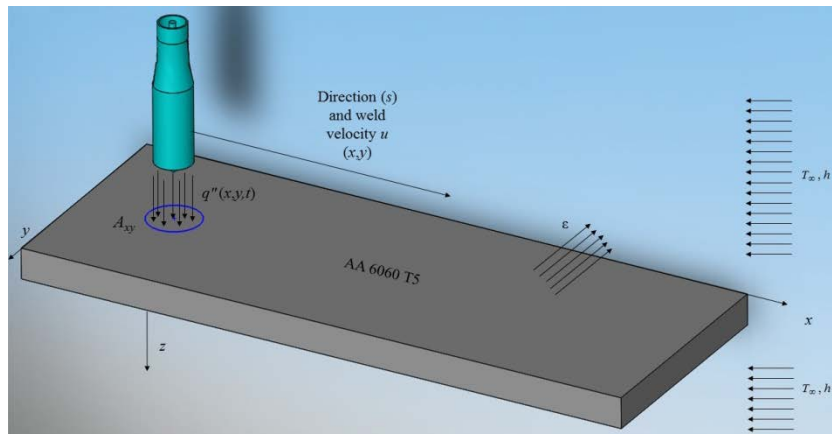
Scheme representation of the three-dimensional thermal welding process
